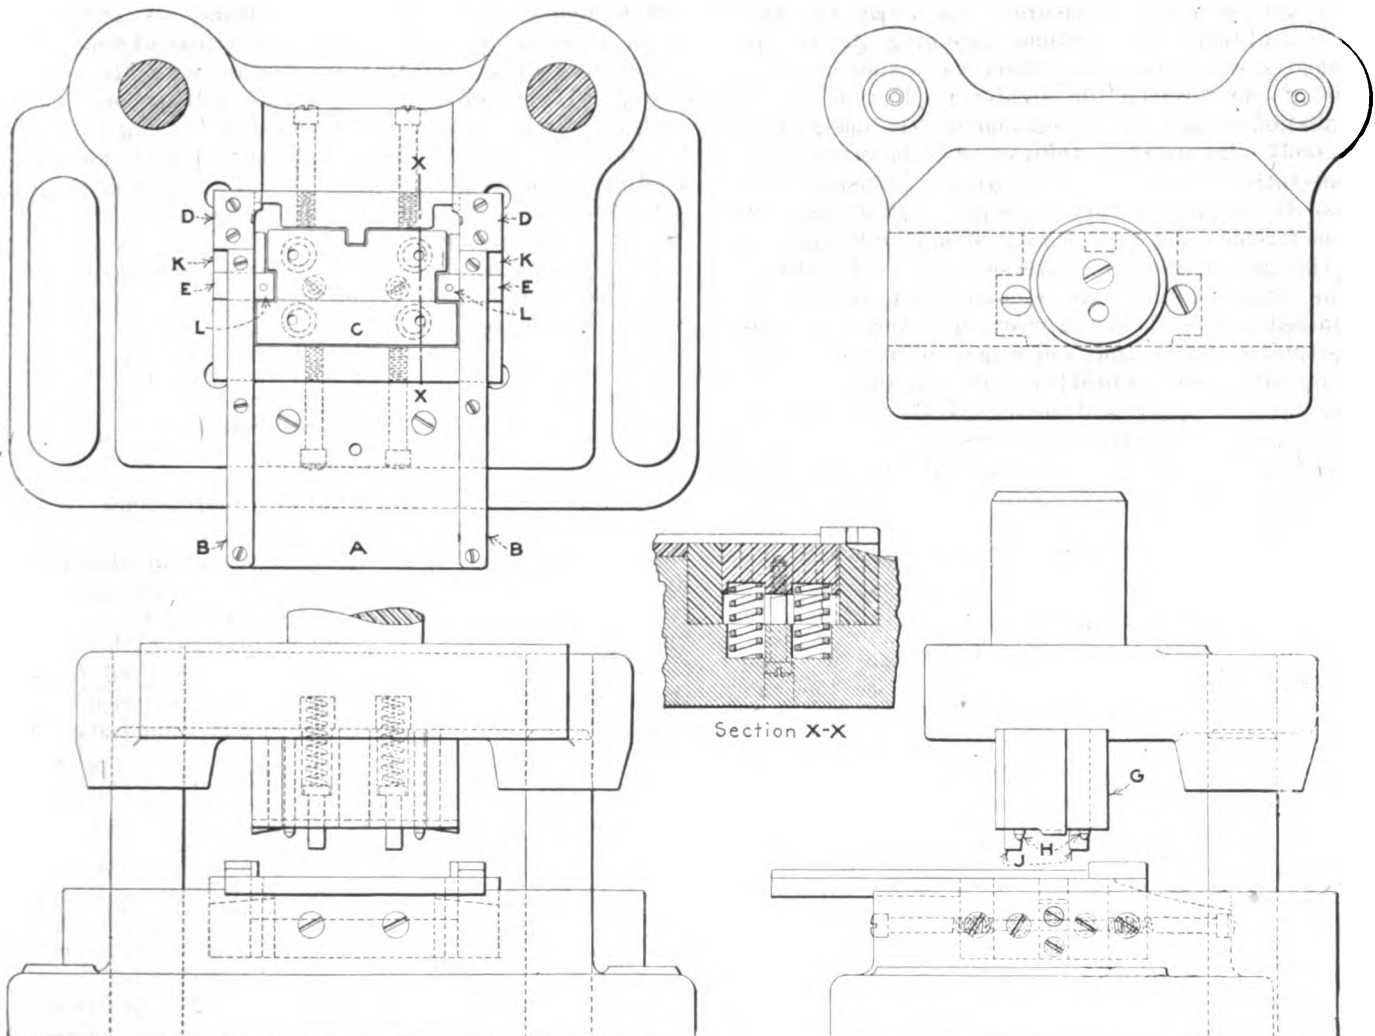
PLAN AND ELEVATION OF FORMING DIE
